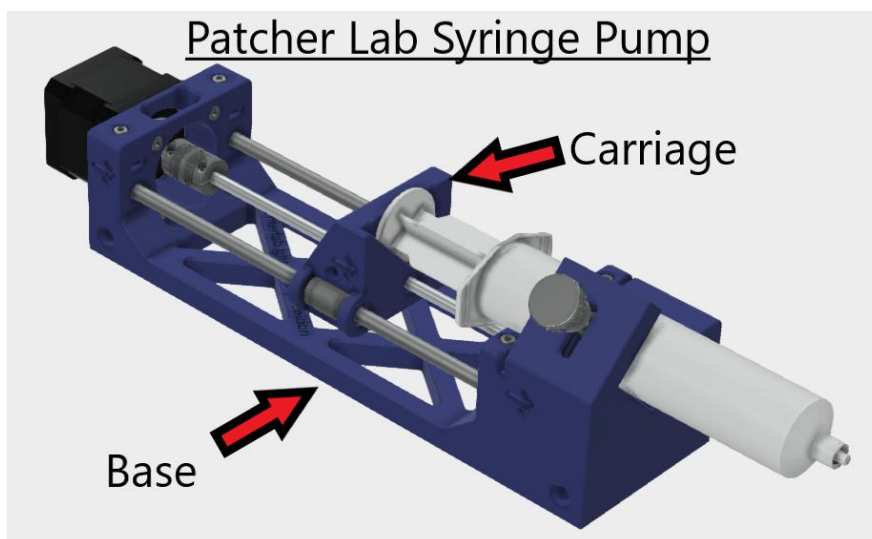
The original design of the Patcher Lab Poseiden Syringe Pump [77], highlighting the parts that are altered in this projects design.
